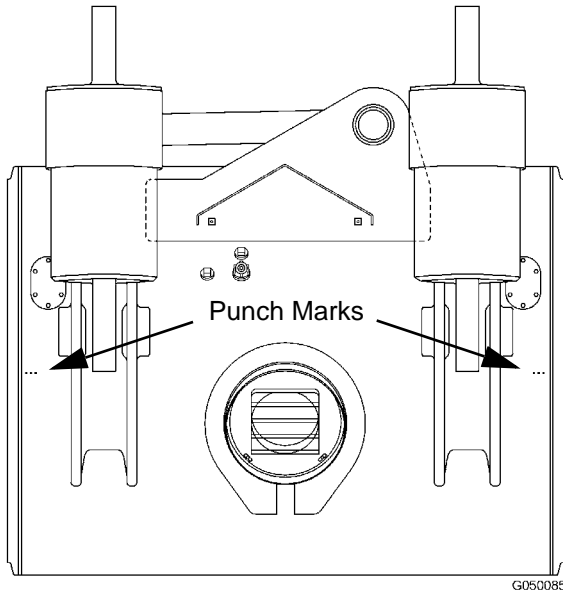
AXLE HOUSING DIMPLE MARKINGS
